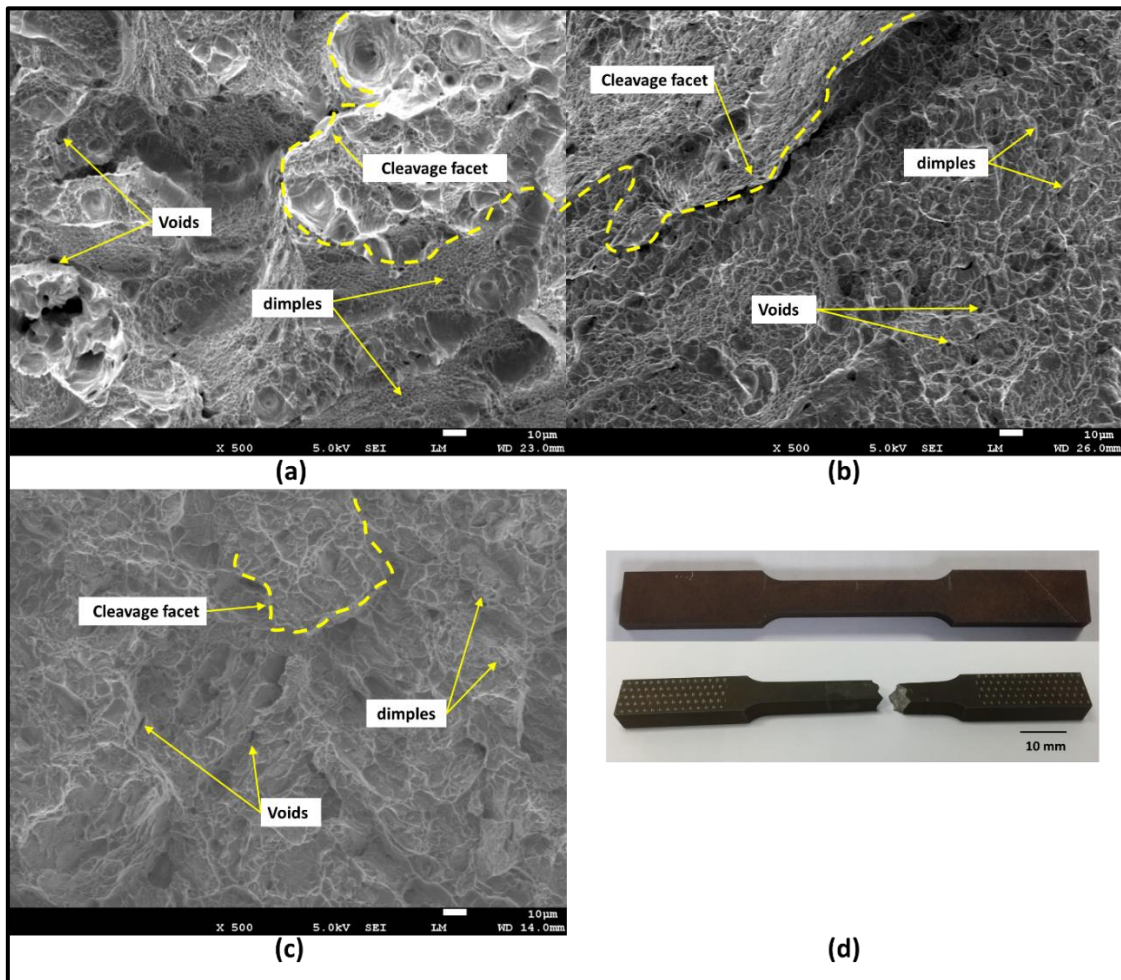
Fracture surfaces after tensile test (a) TiTa (b) Ti6Al4V (c) cpTi samples and (d) samples of tensile test coupon before and after fracture
